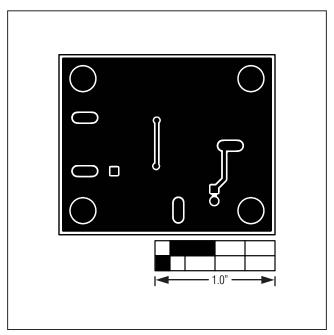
MAX9911 EV Kit PCB Layout—Solder Side
